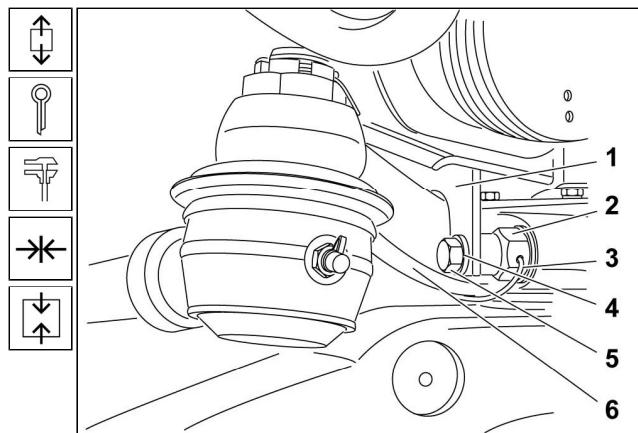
Checking the tightening-up of steering arms screws at steering knuckles
